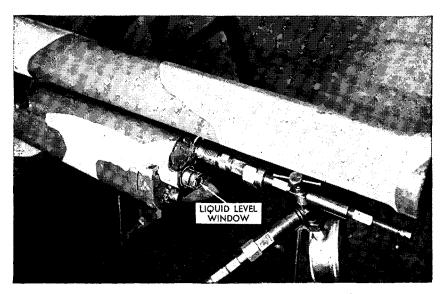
Front end of cradle with adapter (see fig. 102), air-filling tube (C61285), air-filling tube, flexible (C419), gauge (B747), in position for reestablishing gas pressure in counterrecoil system.
